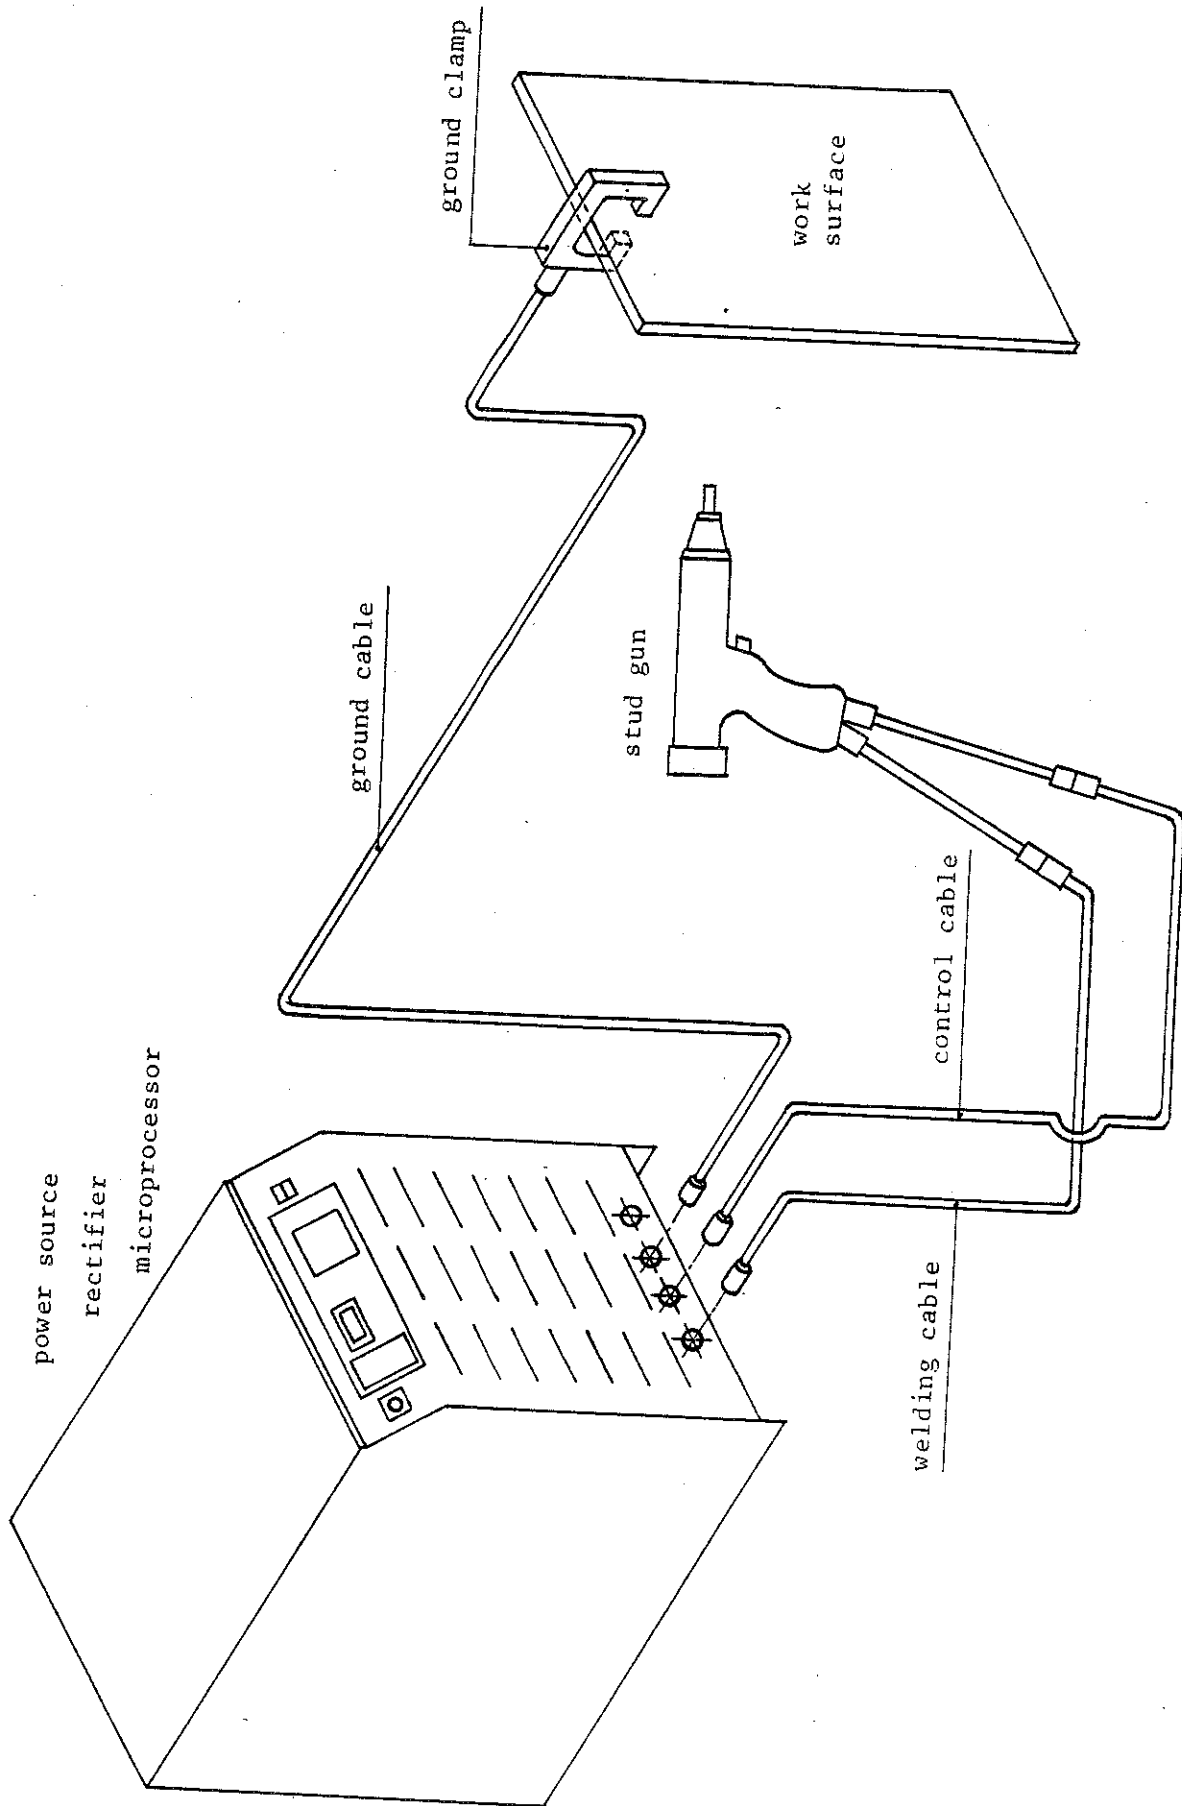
PRINCIPLE OF THE STUD GUN WELDING SYSTEM
